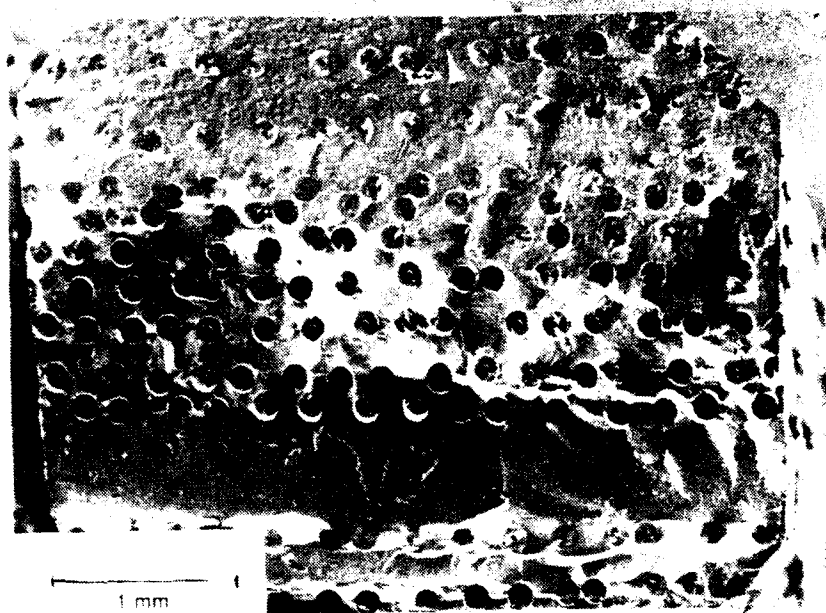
Fracture surface from the STSR test. White arrow indicates failure origin. Tensile surface is at the top of the photo.
